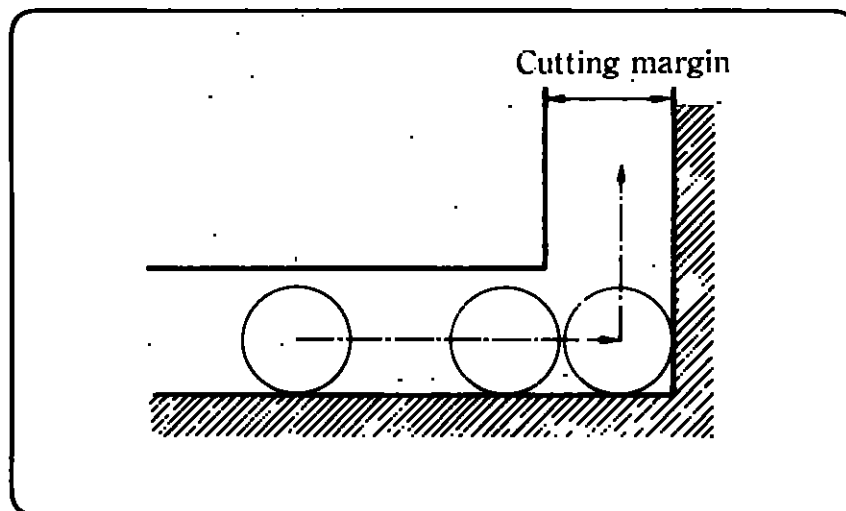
Tool diameter is not greater than 1/2 of cutting margin.
